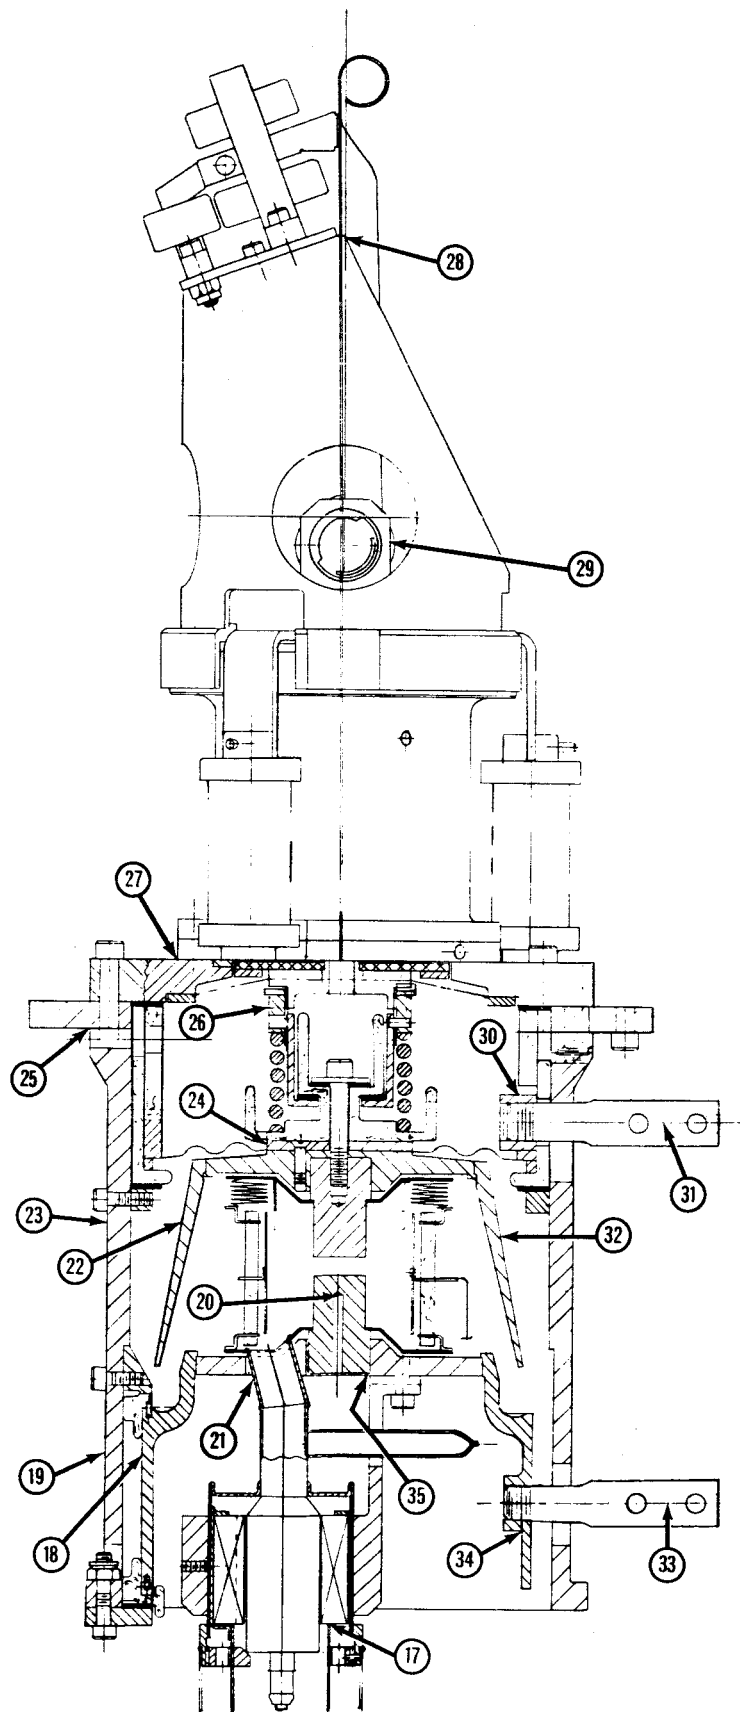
Cross-Section Drawing of AC Breaker with Vacuum Capsule in the Center and Radiators (#18 & #22) Attached for Heat Transfer.
